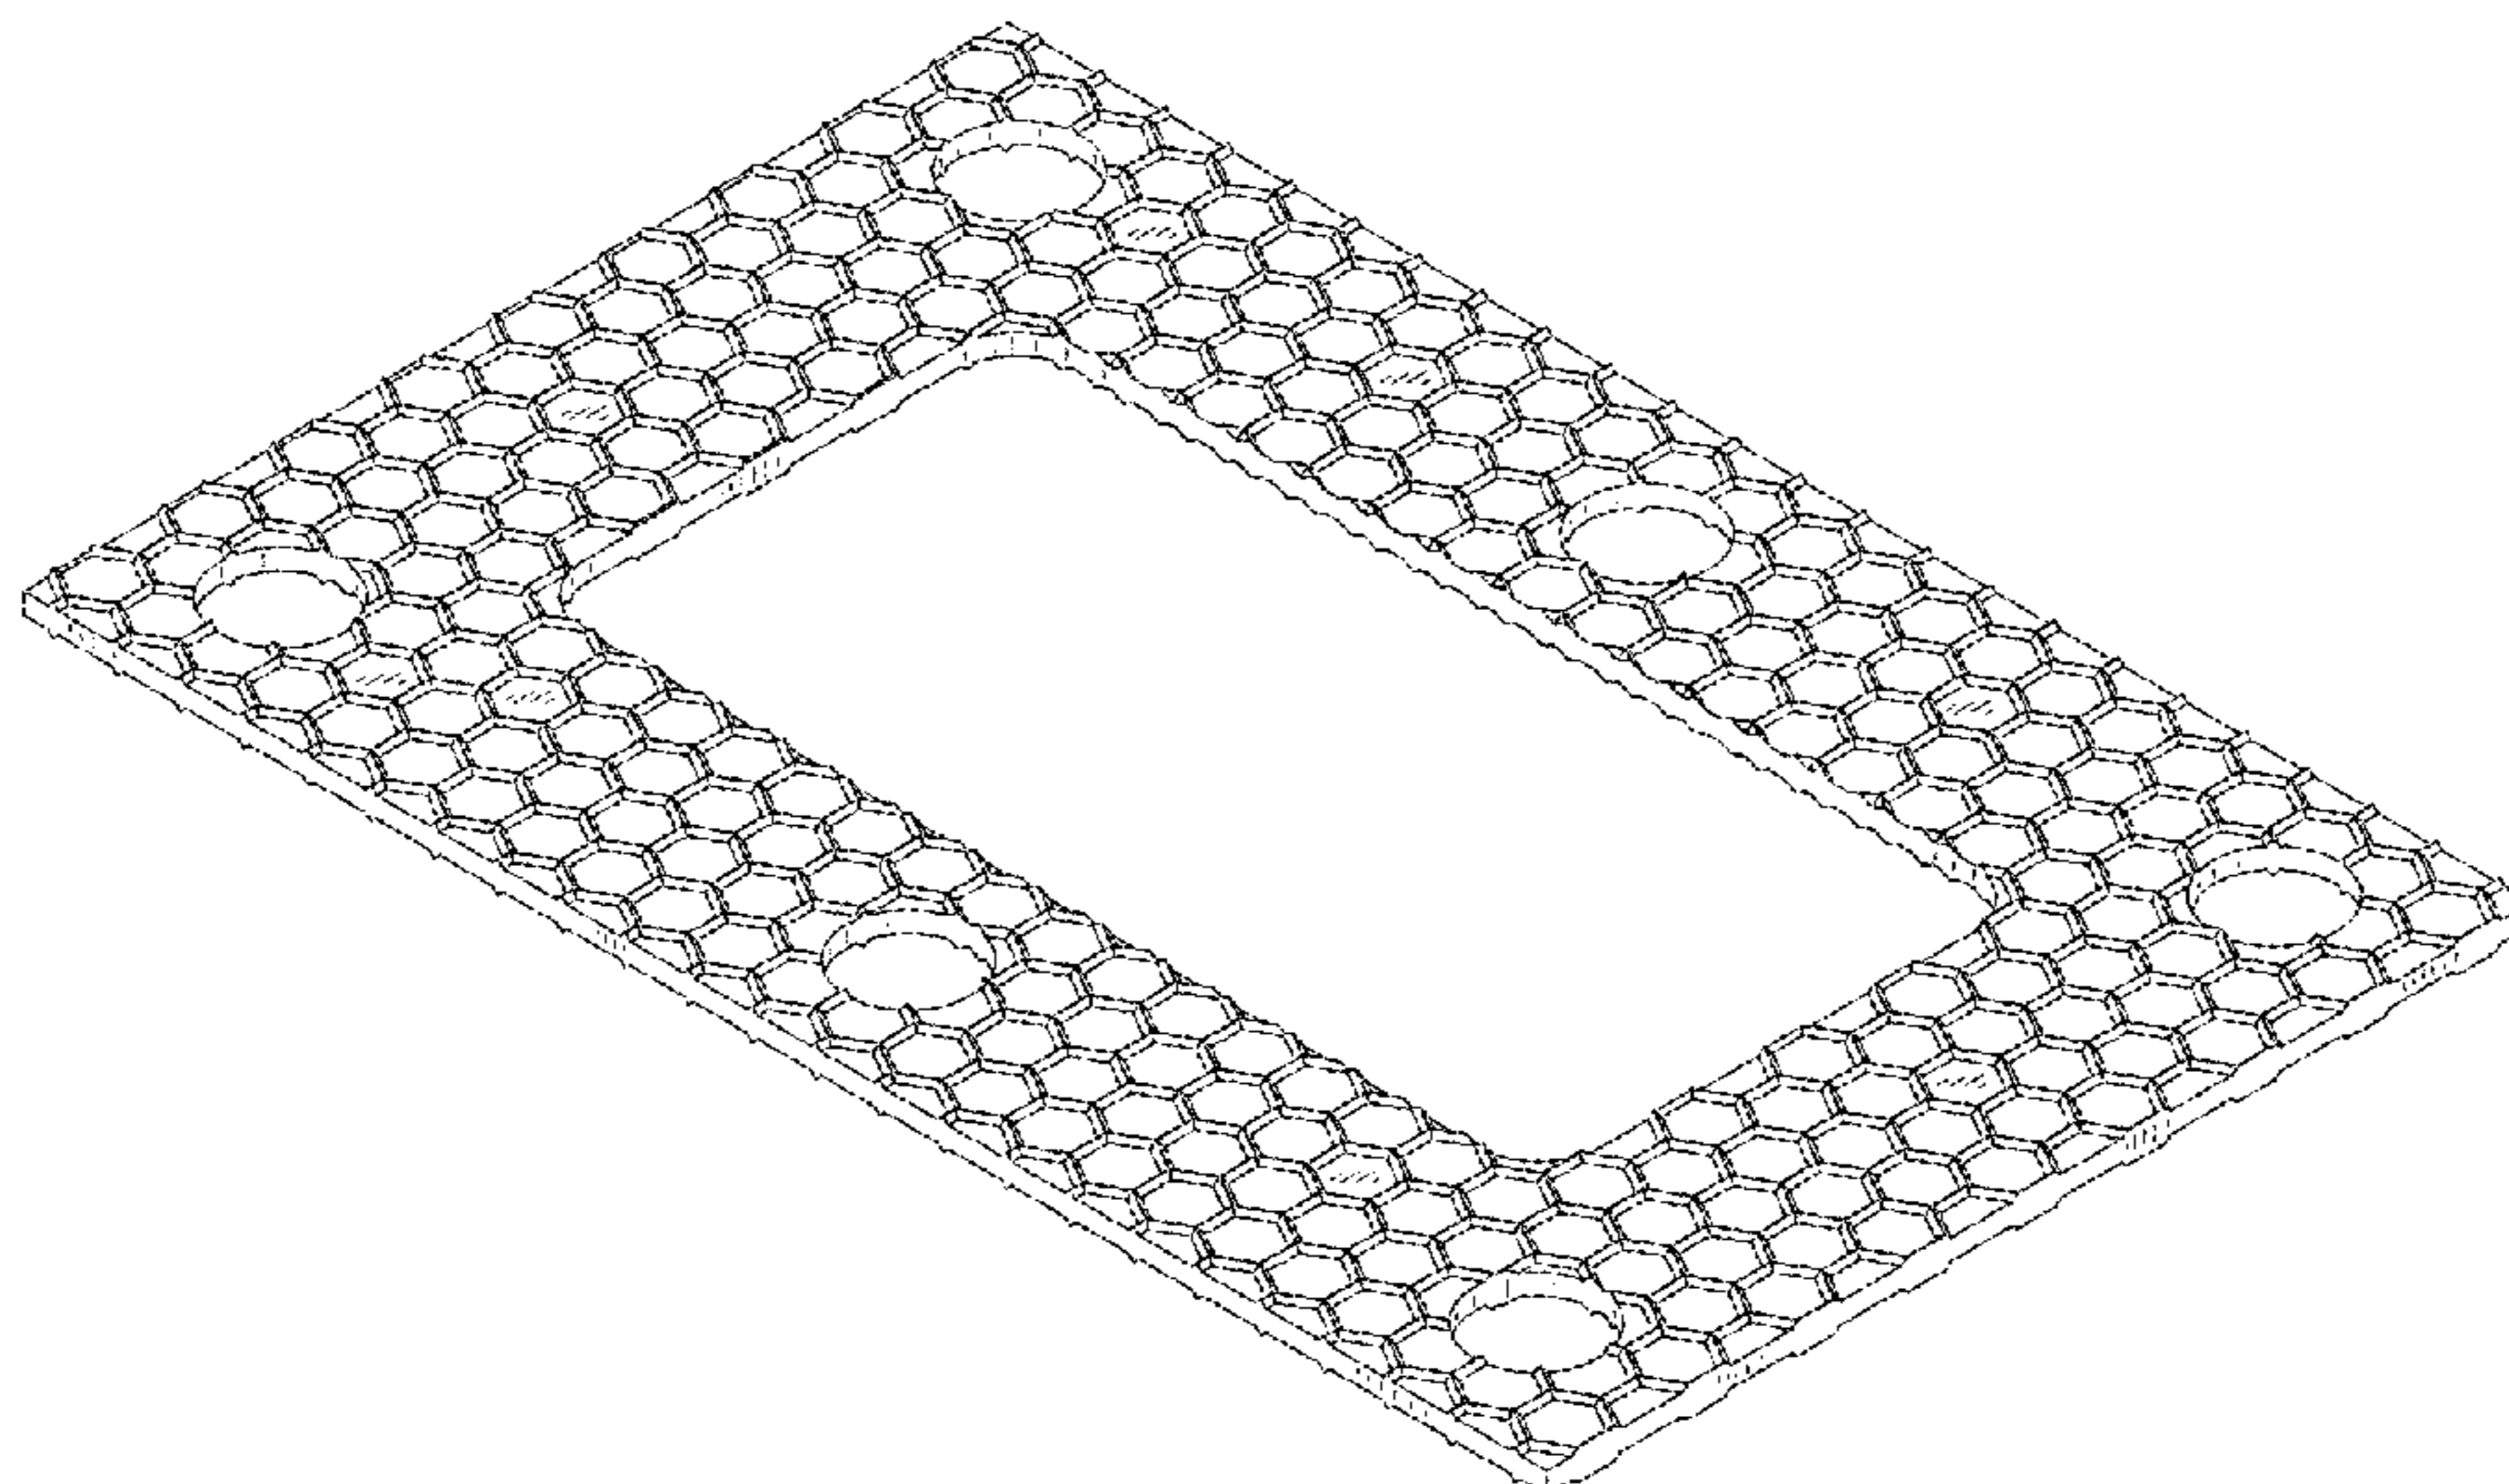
is a front perspective view of the gasket having raised sealing surface pattern;
